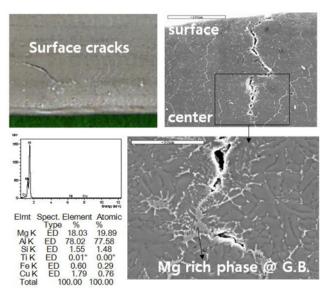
Surface crack and crack path during casting in Al-5.5wt%Mg-0.02Ti alloys
